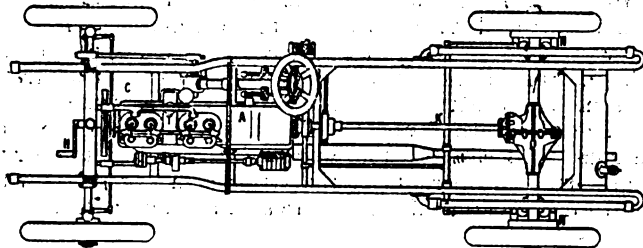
Plan of Chassis of Motobloc 16-22-h.p. Live Axle Car.
